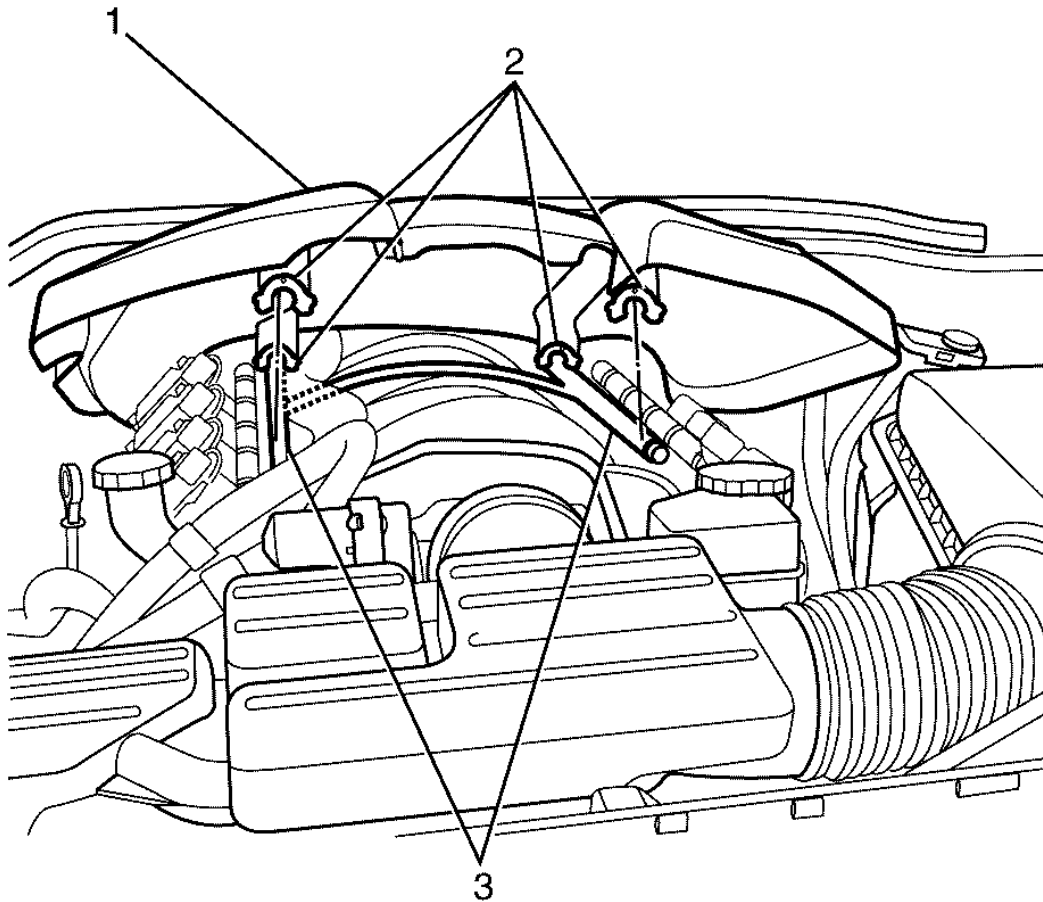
Identifying Engine Cover To Fuel Injector Rail Retaining Clips
